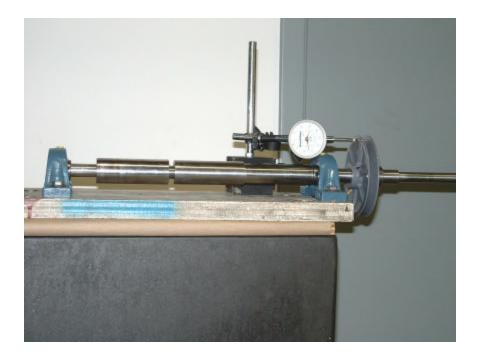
The high precision shaft and pillow blocks were mounted onto a steel plate. The dial indicator is set up to measure side to side run out.
